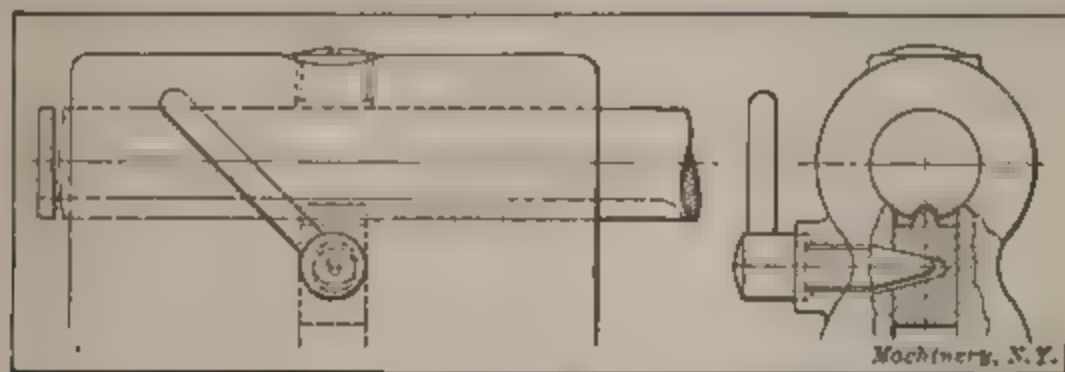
Wedge Action Clamp for Grinder Tailstock
